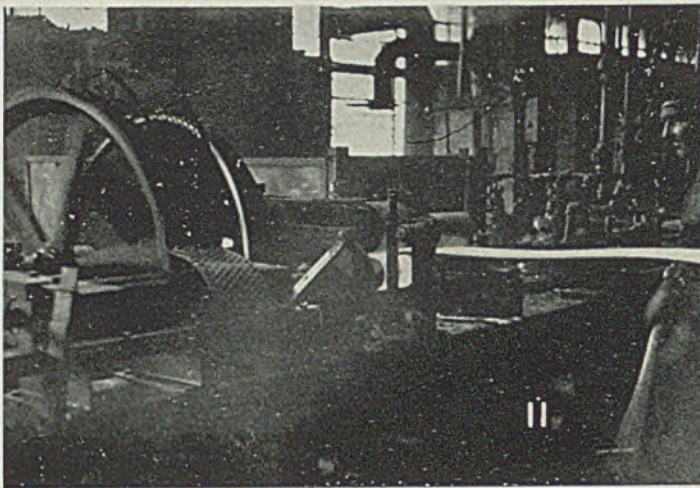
At opposite end of furnace shown in Fig. 10 hot blank is withdrawn, eye fastened to mandrel of forming machine and then the volute rolled up as shown here. Stripped from mandrel, work falls into oil quench tank
